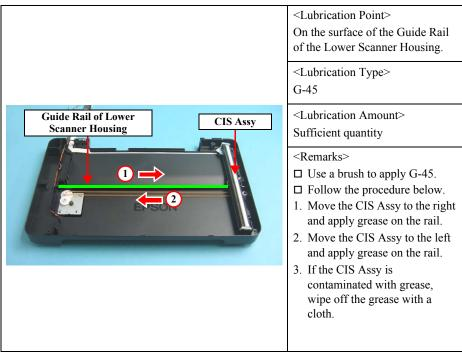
Lubrication on the Guide Rail of the Lower Scanner Housing
